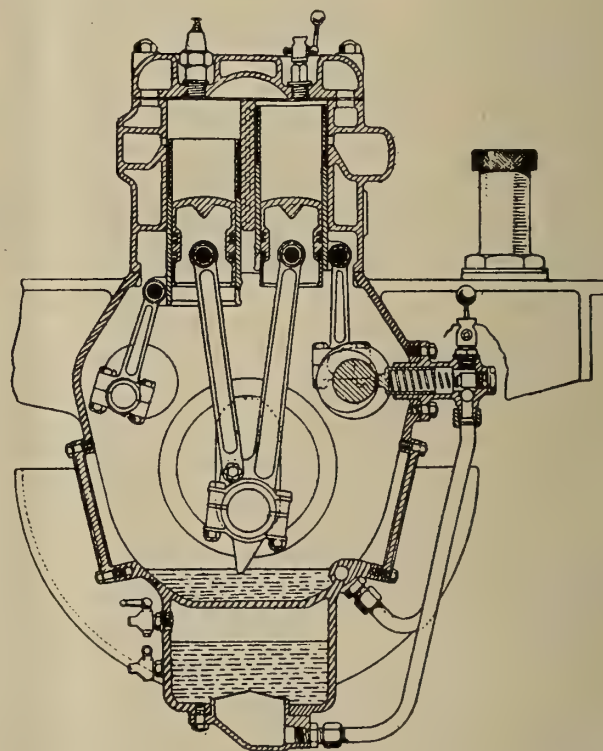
DUPLEX SLEEVE VALVE MOTOR, SECTIONAL END VIEW FROM THE FRONT
